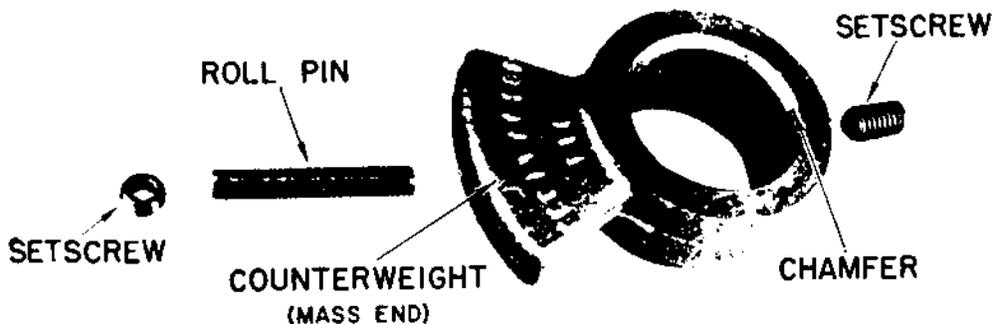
Counterweight, Roll Pin, and Setscrews
